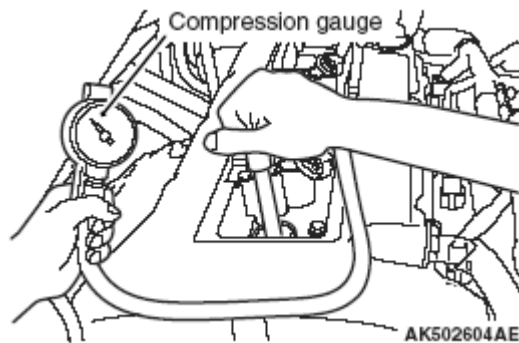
Setting Compression Gauge To One Of Spark Plug Holes
